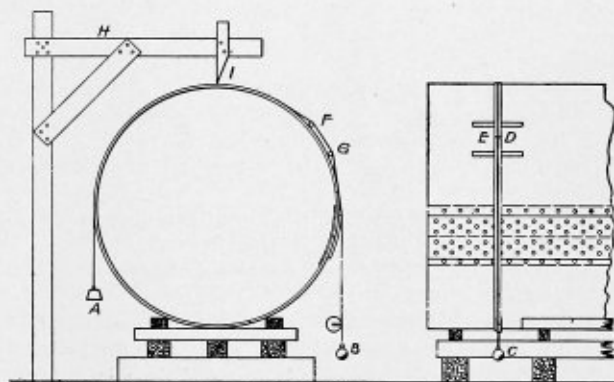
Sketch of a Boiler Shell, With Steel Tape in Place
